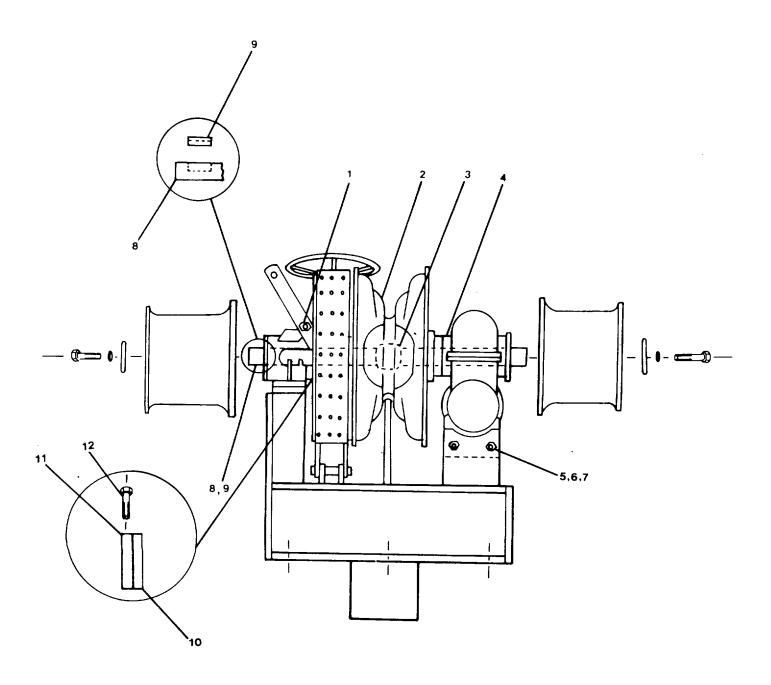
Bow Anchor Windlass Clutch and Drive Components.
